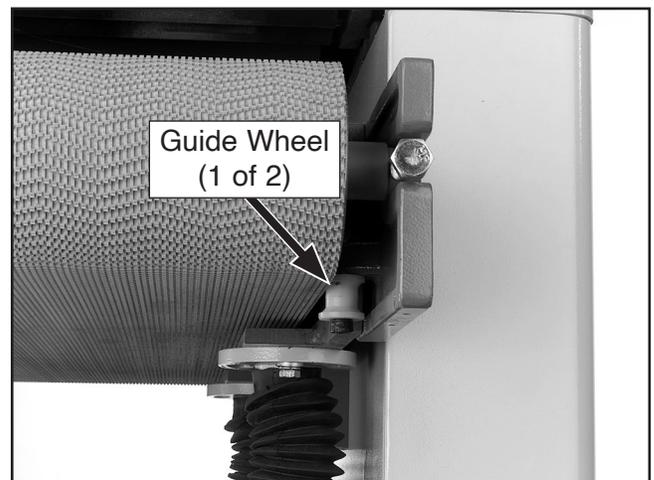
Location of conveyor belt guide wheels (safety guard removed for clarity).
